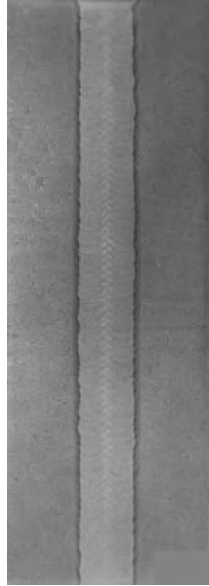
Macroscopic section of a weld carried out by the wire/flux process
